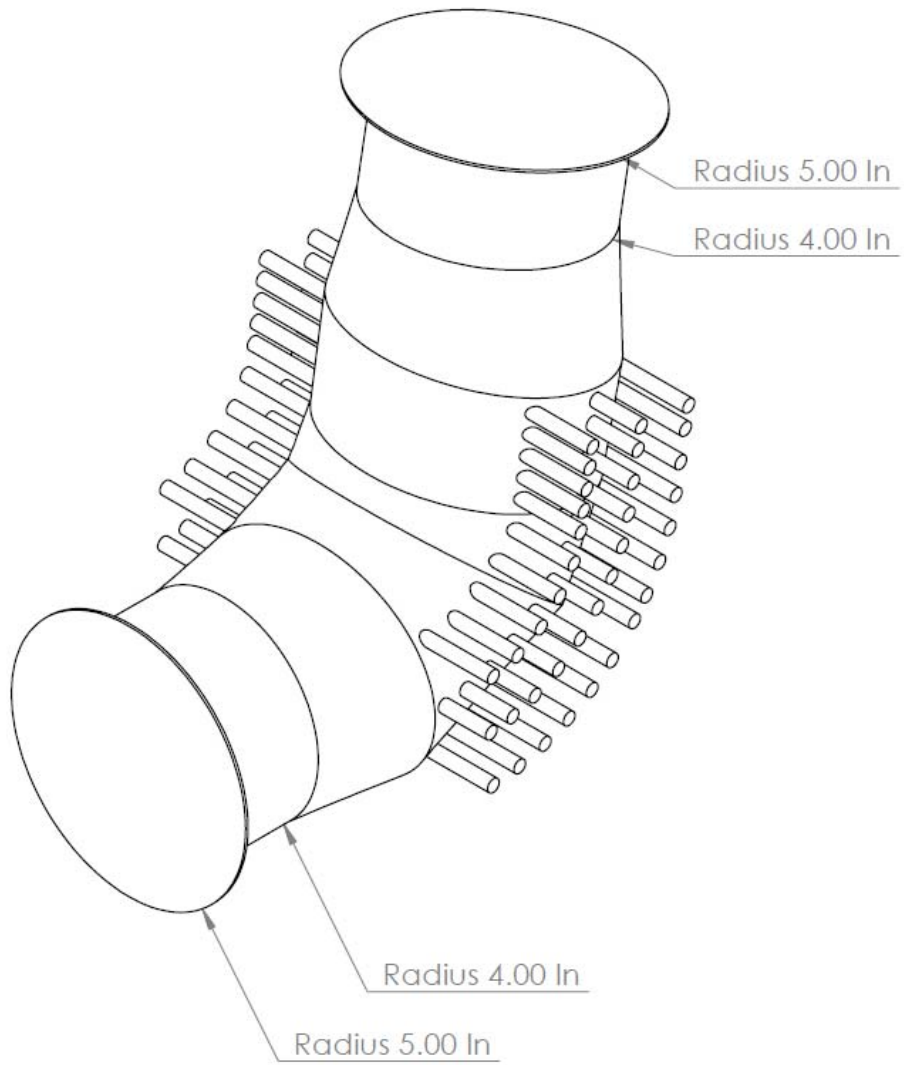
Isometric SolidWorks Drawing of Heat Exchanger.
